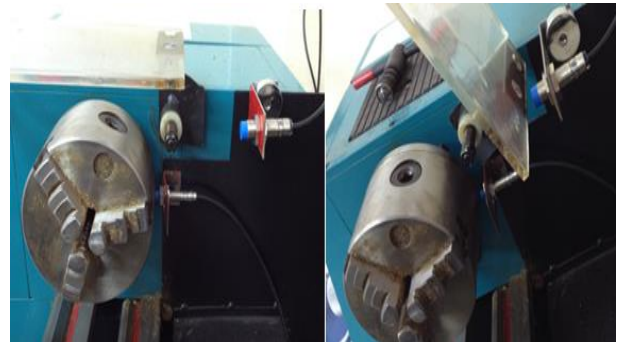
Spindle speed control sensors assembled on lathe (Devir kontrol sensörlerinin torna tezgahı üzerindeki montajı)
